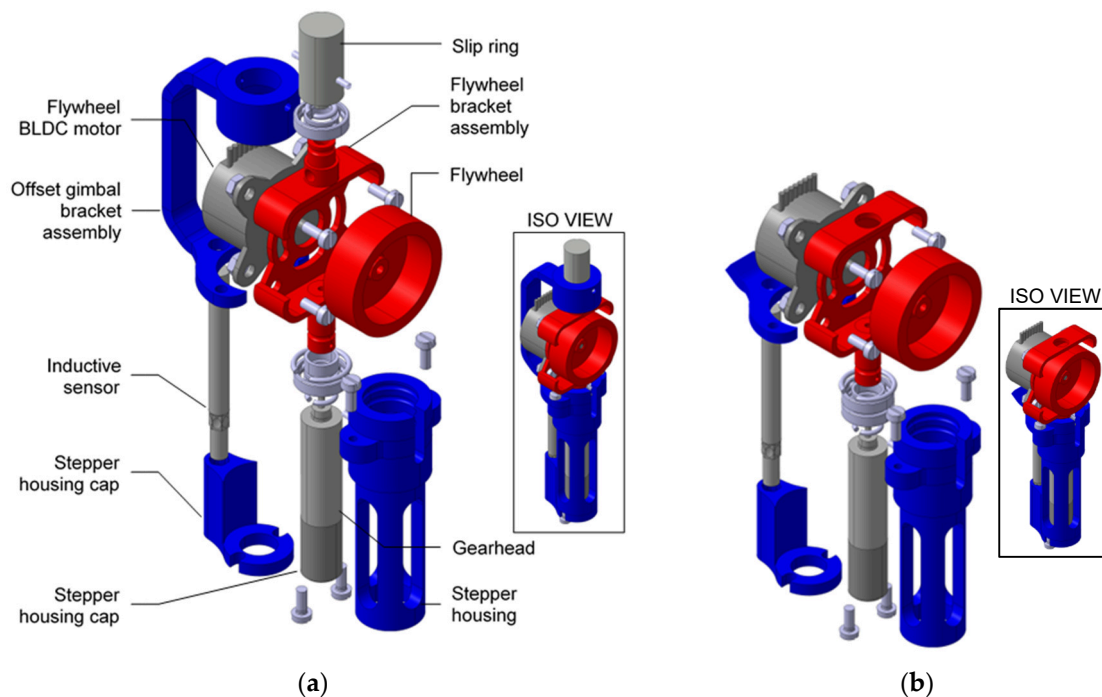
(a) CMG exploded and iso view with slip ring; (b) CMG exploded and iso view without slip ring.
